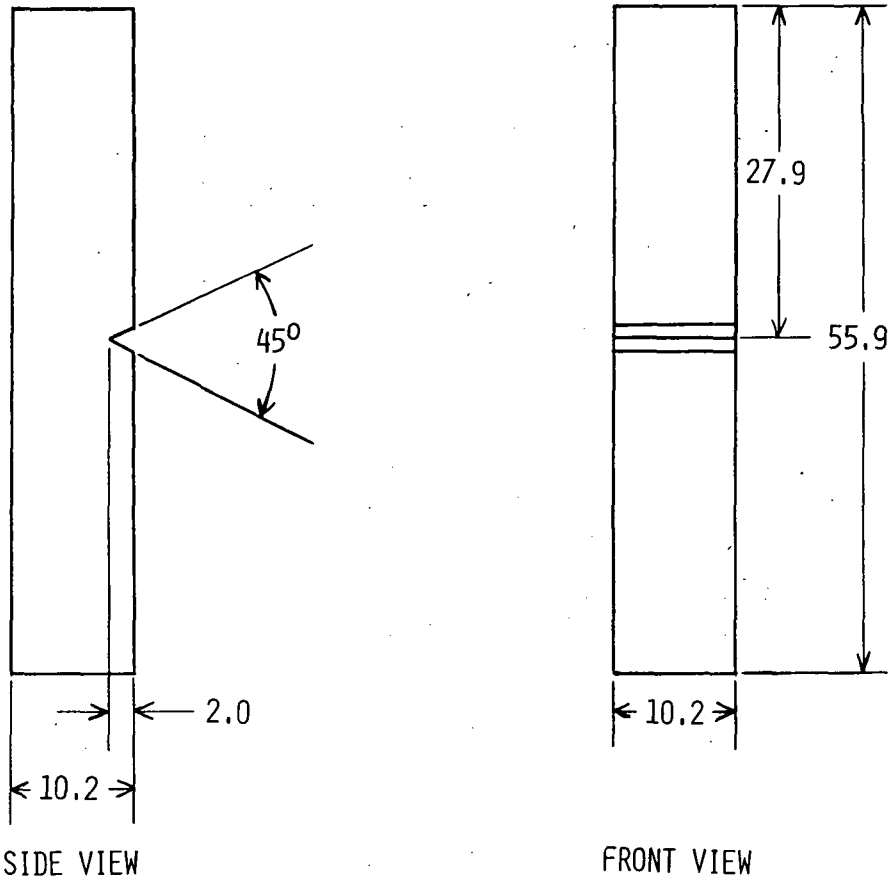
Charpy V-notch specimen configuration. All dimensions in mm.
